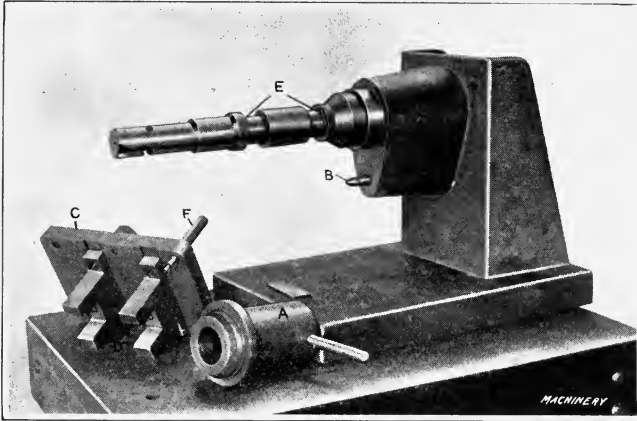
Gage used in testing Holes in a Transmission Case, the Work being mounted on the Arbor for the Purpose
